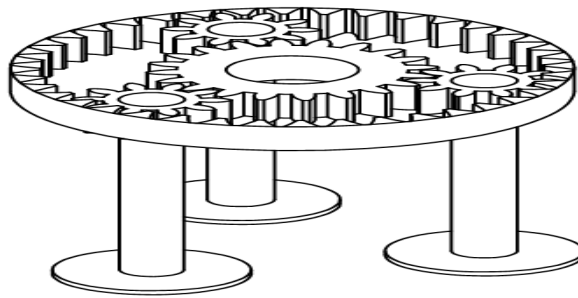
Actual Drawing view 2 after assembly in drawing format (mechanism for lapping)
